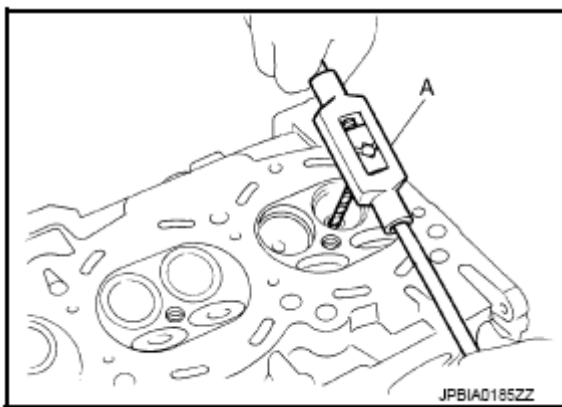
Reaming Cylinder Head Valve Guide (EXH) Hole Using Valve Guide Reamer
